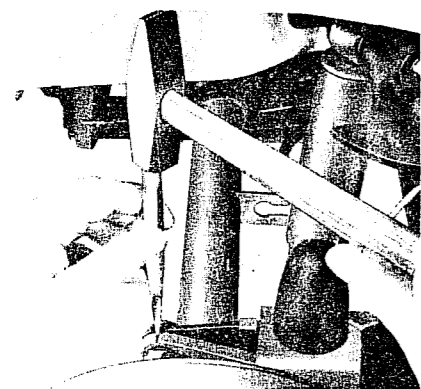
Marking the relative positions of the bearing housing and spring plate before removal - Swing axle.
